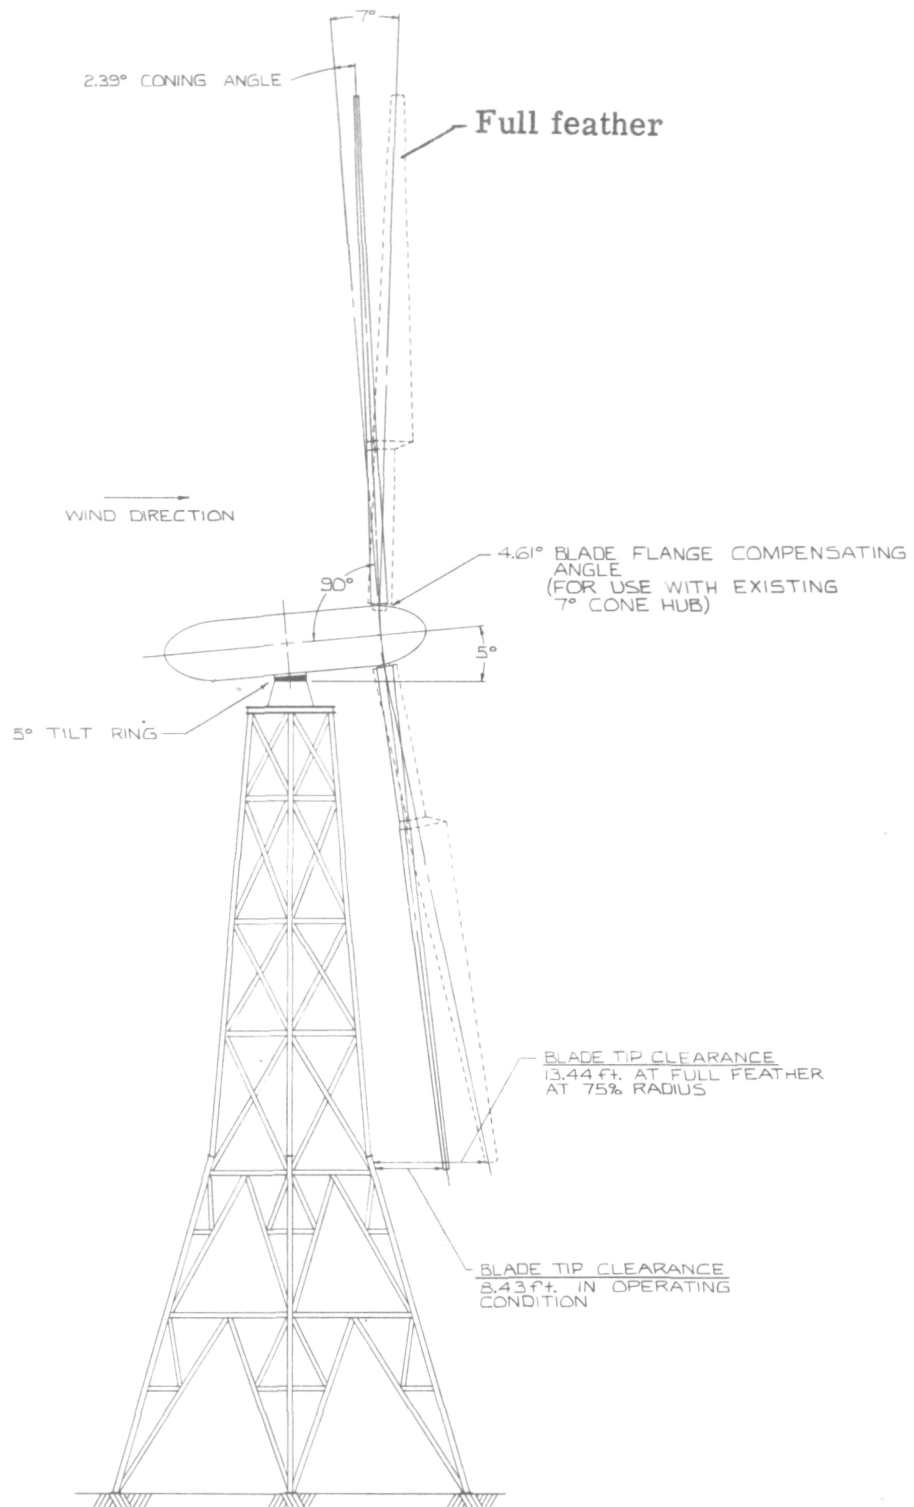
Scheme I. Rotor downwind of tower. Blades coned downwind.
